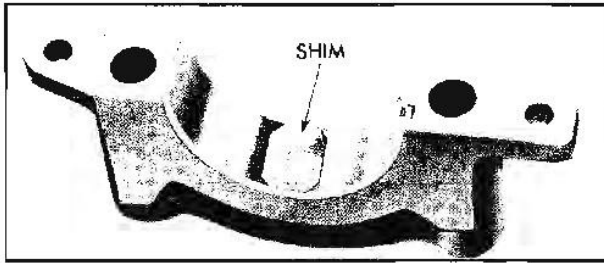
002 Shim Positioned in Cap for Checking Bearing Clearance
